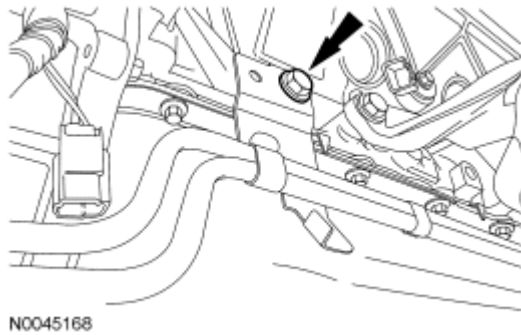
Locating Transmission Cooler Line Bracket Bolt
